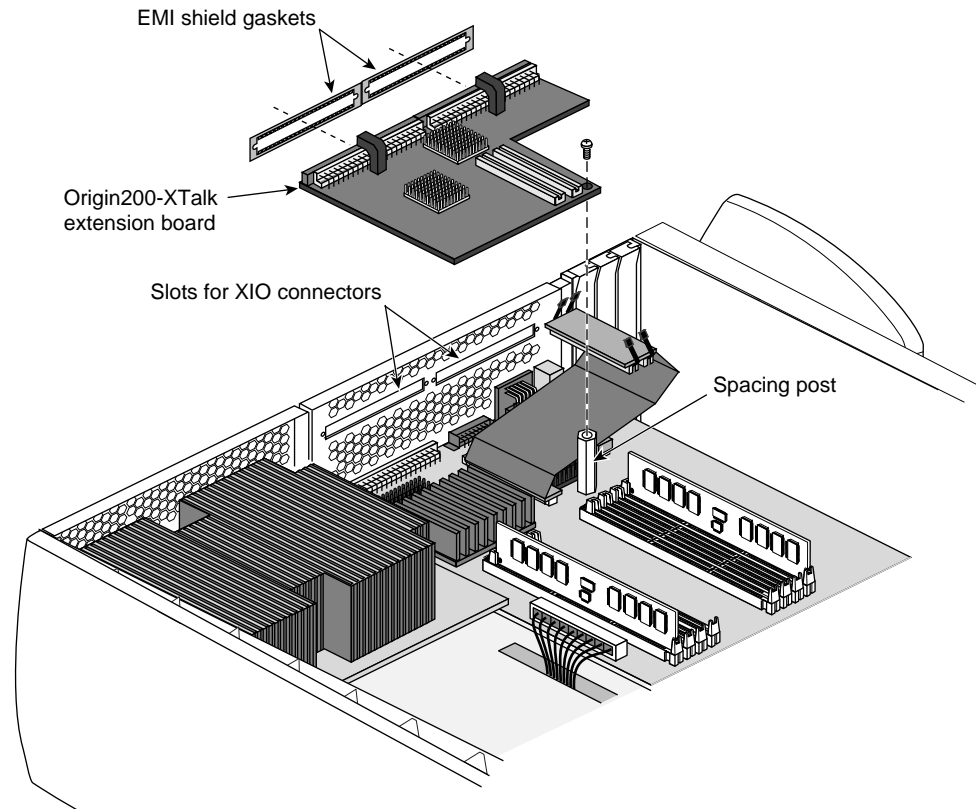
Attaching the XTalk Extension Cable Assembly (Flex Cable)
